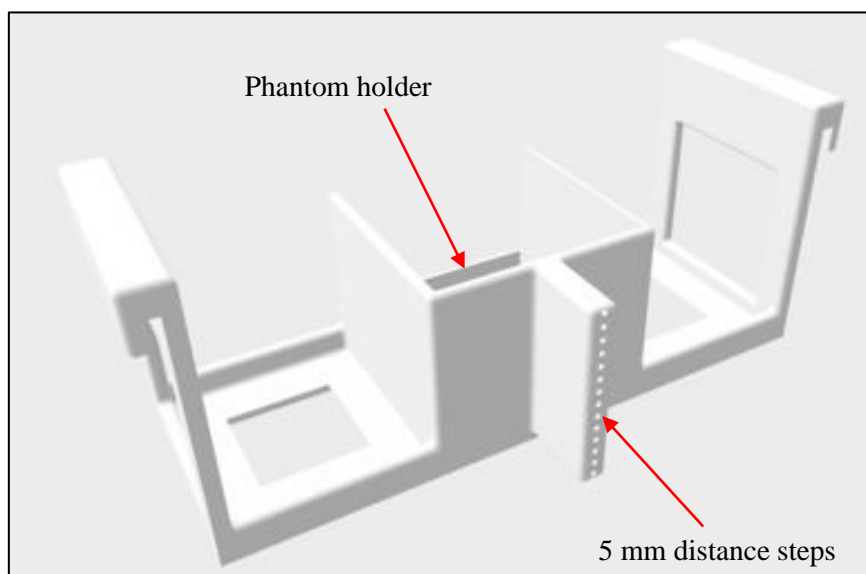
CAD drawing of the ABS phantom holder.
